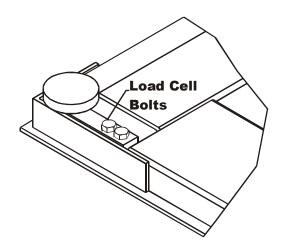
REMOVING LOAD SENSOR BOLTS AND FEET
